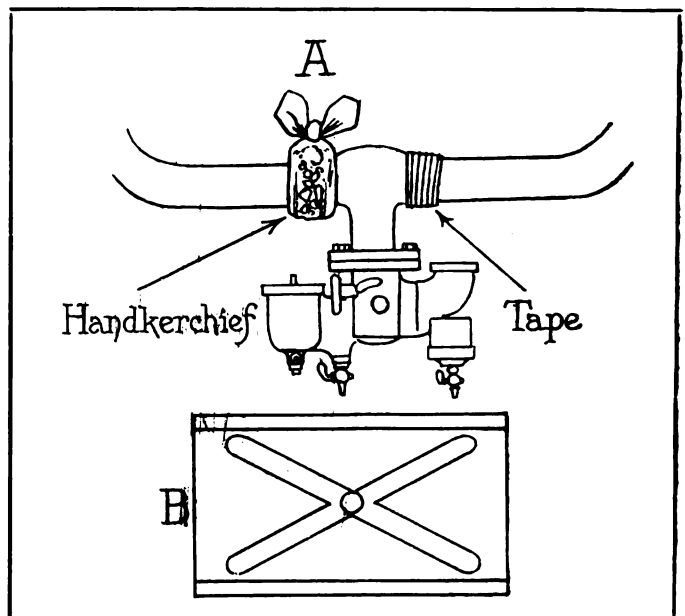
A. Emergency Repair of a Cracked Manifold; B. Illustrating How Oil Grooves Should Be Cut to Insure Better Lubrication of Plain Bearings.
